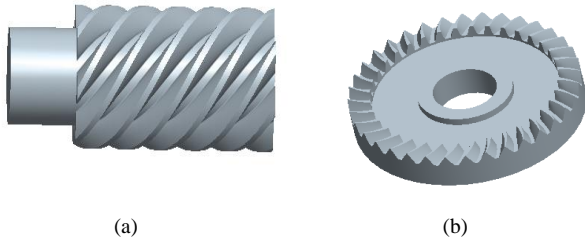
Involute spiral cylindrical gear and Small modulus spiral flat gear
